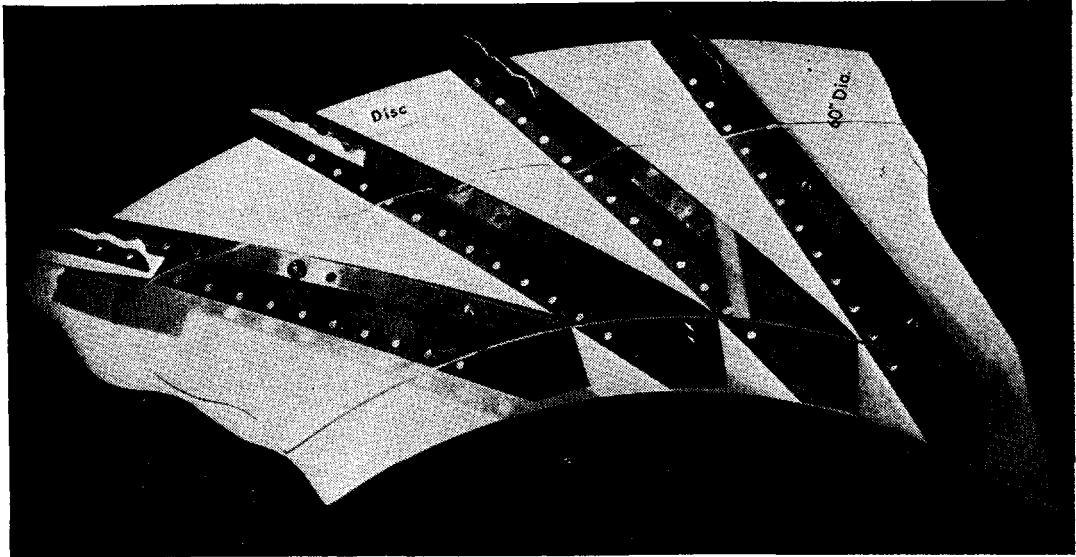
FAILURE OF IMPELLER VANES IN COMPRESSOR/EXHAUSTER
